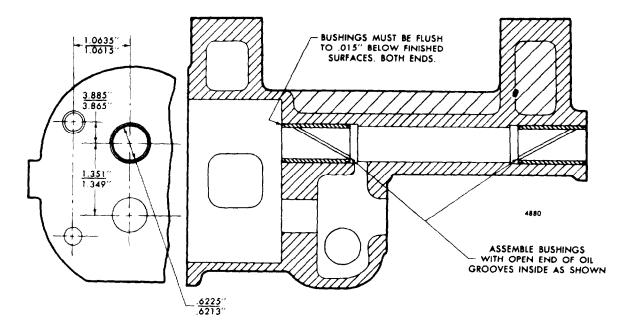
E-7. Diameter and Location of Bushing in Oil Pump
